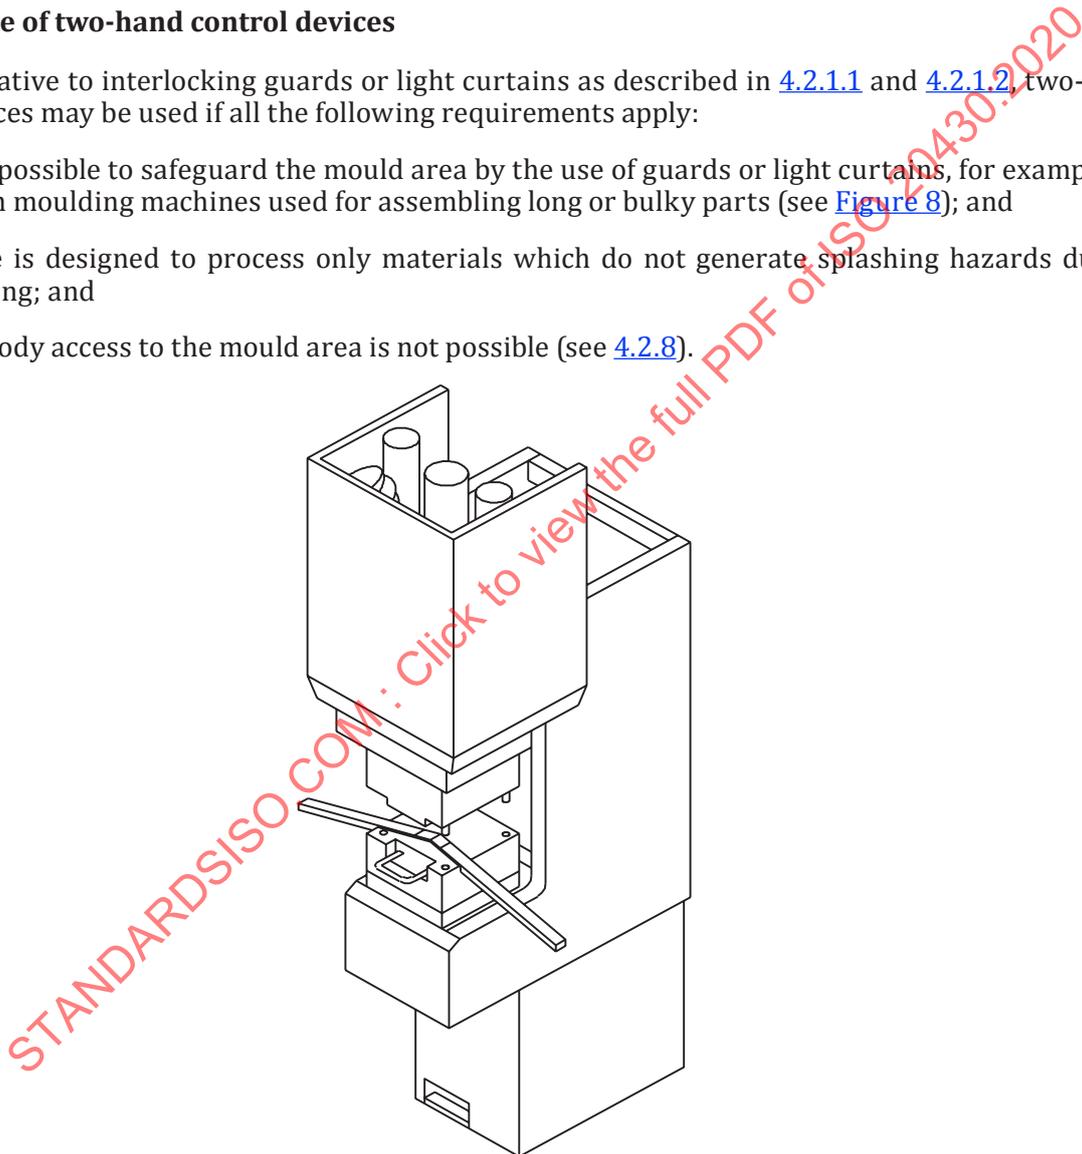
Example of an injection moulding machine for assembling long or bulky parts
